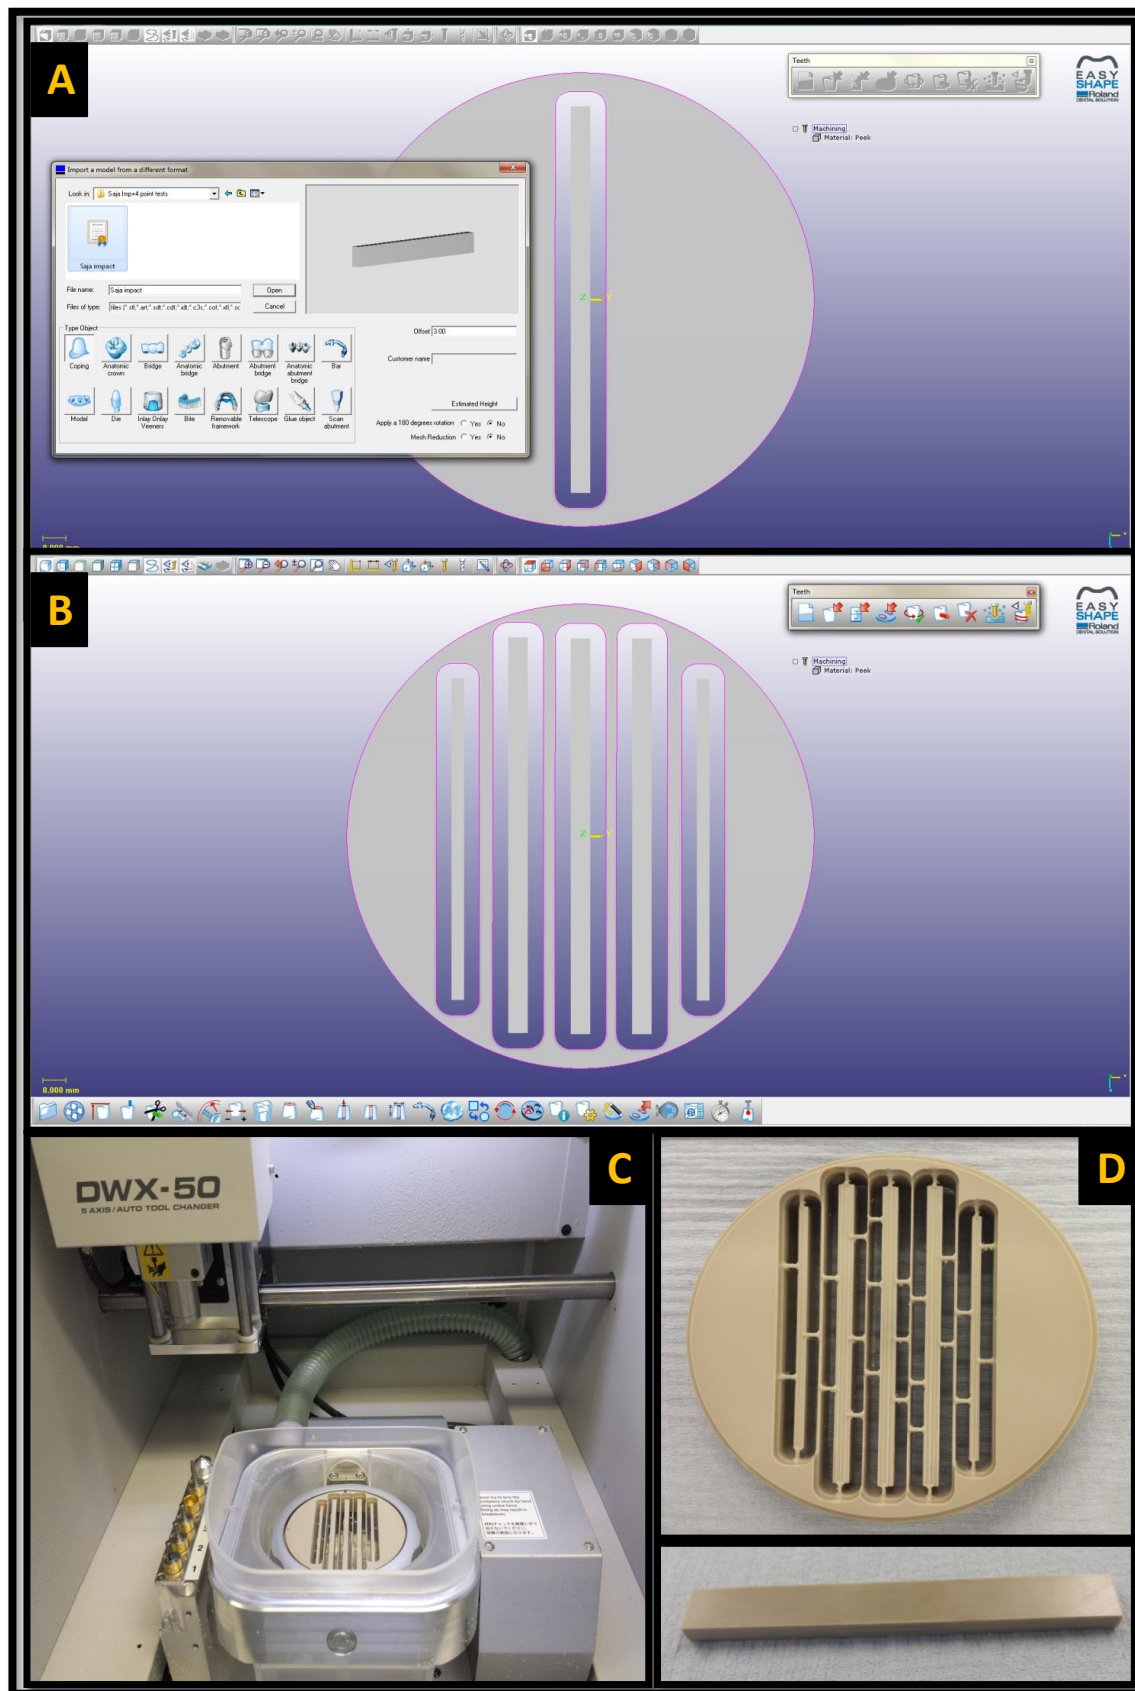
Impact and 4-point bending test samples prepared using A&B. design milling program; C. fabricated using milling machine; and D. milled PEEK samples
